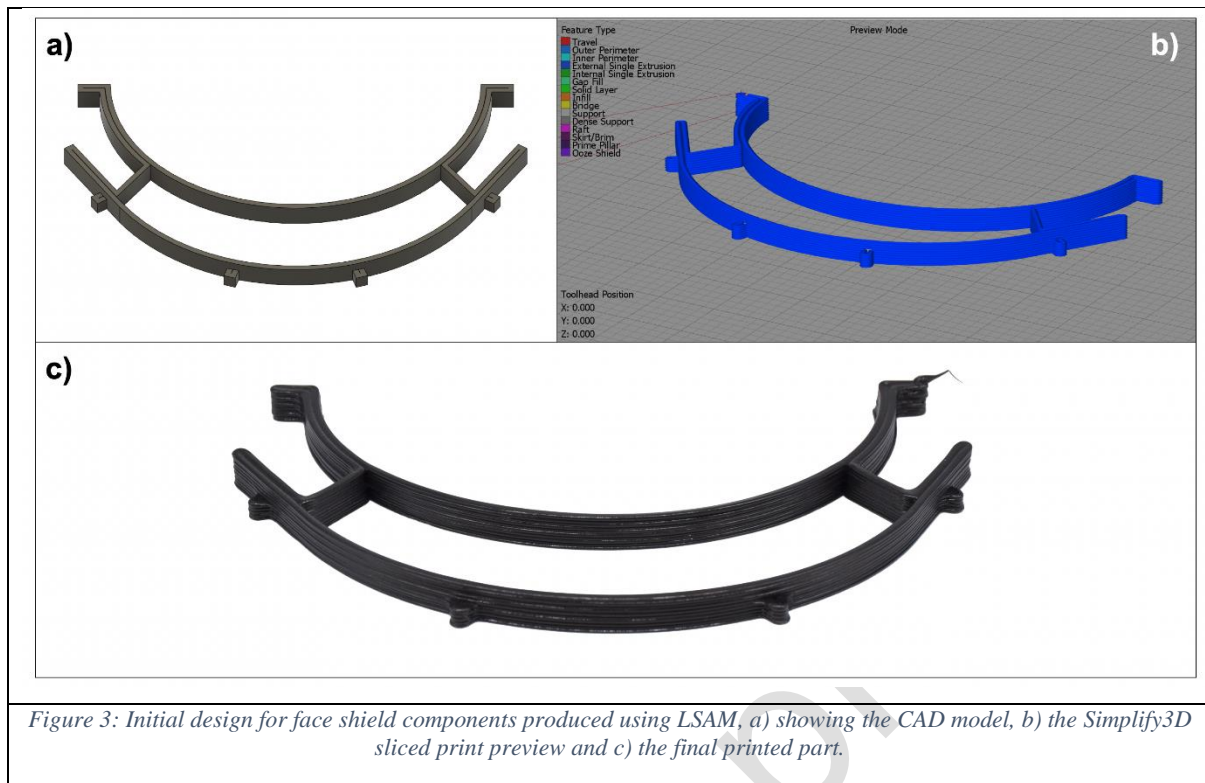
Initial design for face shield components produced using LSAM, a) showing the CAD model, b) the Simplify3D sliced print preview and c) the final printed part.
